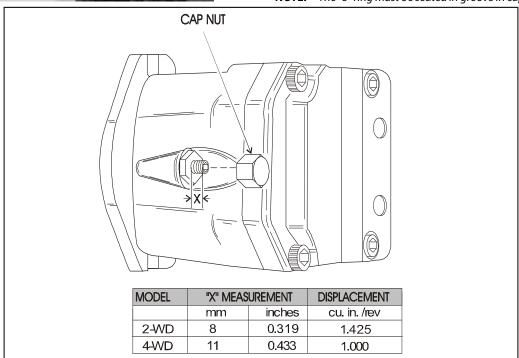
Drive Motor Adjustment (Prior to S/N 0300083332)
